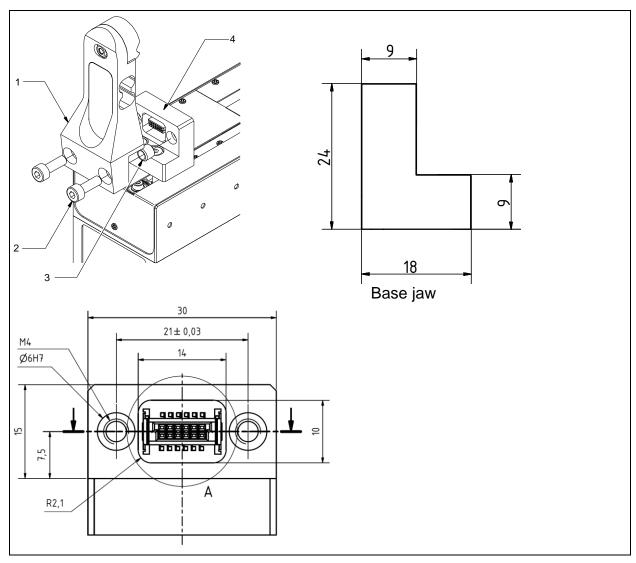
Mounting the gripper fingers (top) and view of sensor port for the base jaw (bottom)
